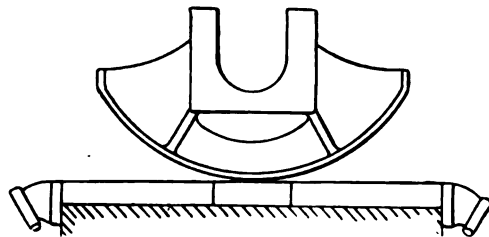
Evolver or Roll Cone of Bilgram Machine.
